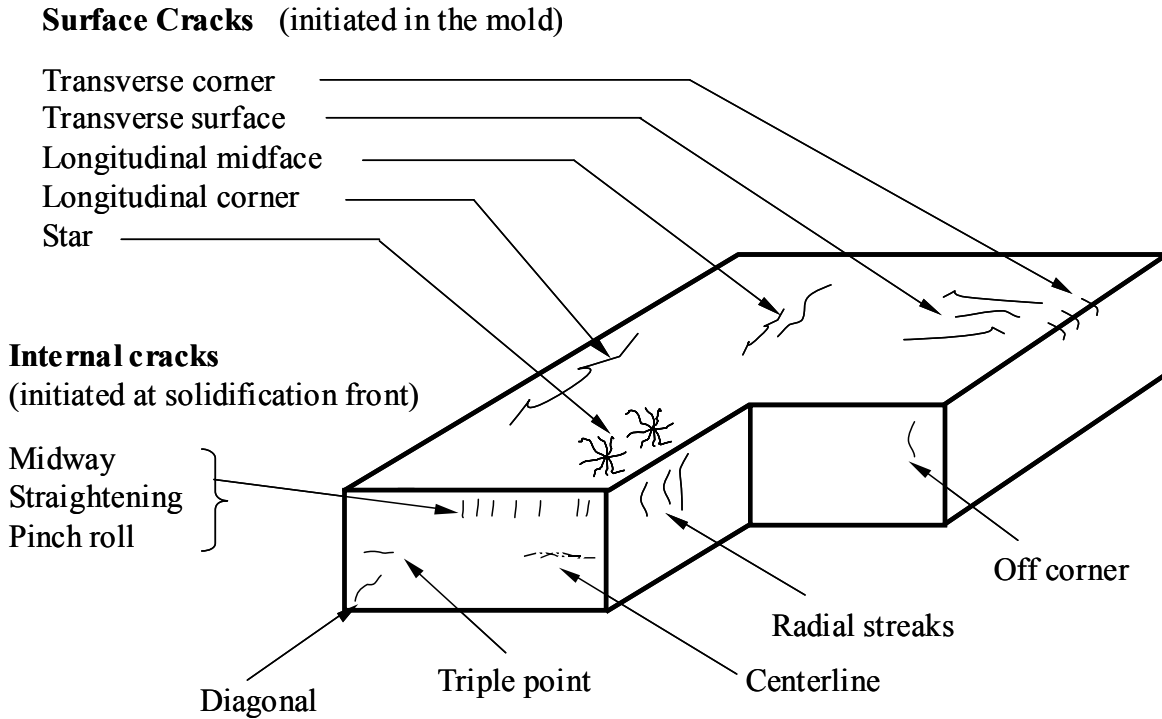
Schematic of crack defects in continuous casting of steel^[53].
